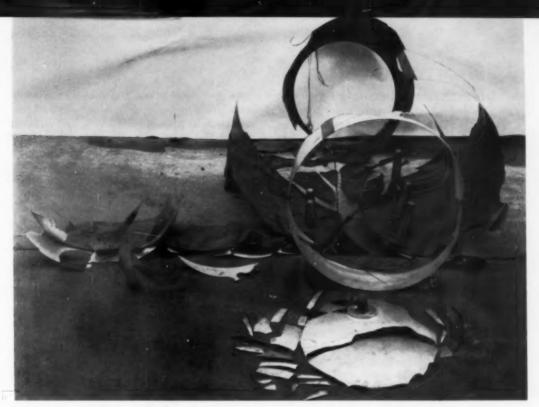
Remains of Full-Scale Missile Casing After Failure. Cylindrical objects resting on the central portion of the fractured pieces are weights used to hold them in position for photograph
